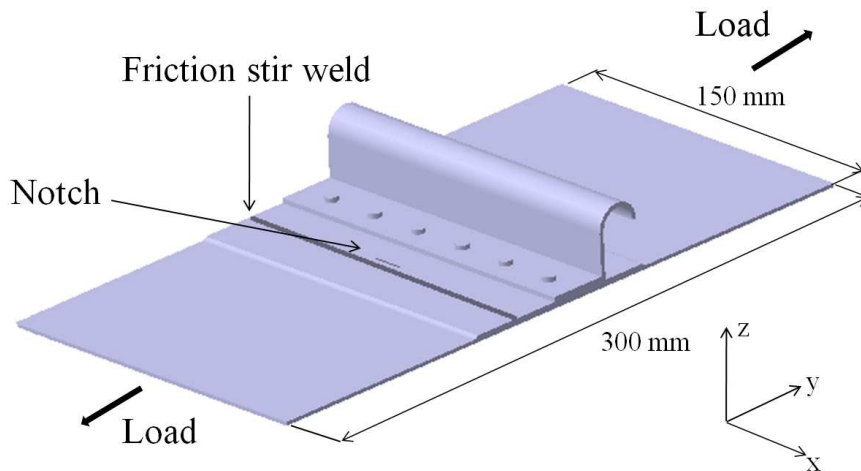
CAD drawing of the stringer panel test sample geometry.
